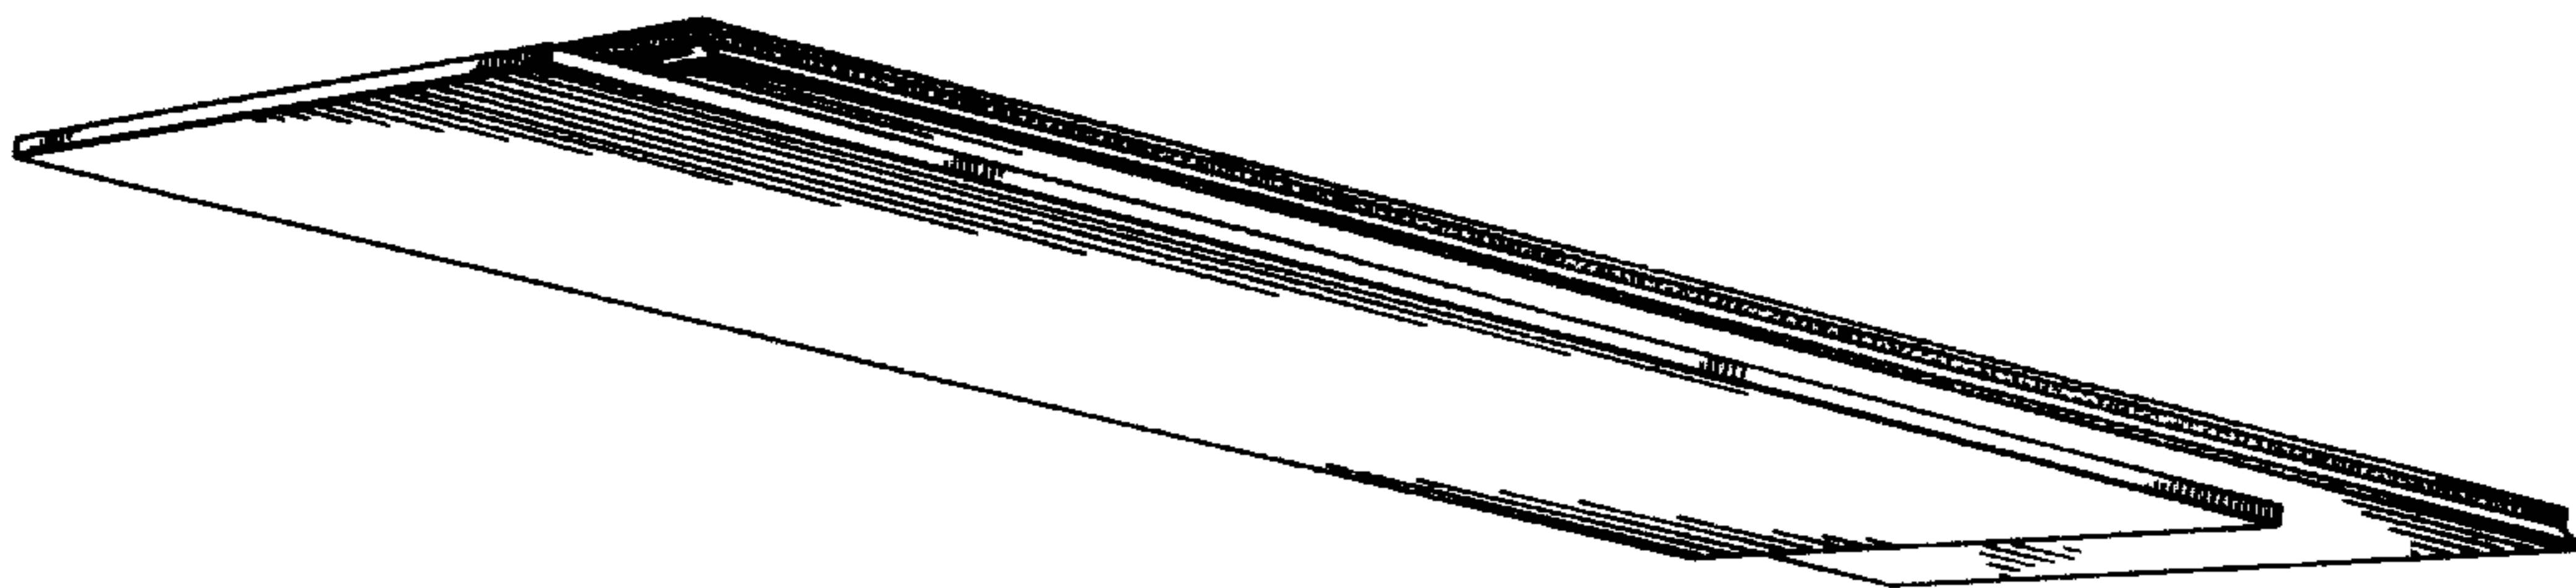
is an enlarged perspective view of the panel as shown in FIG. 2;
